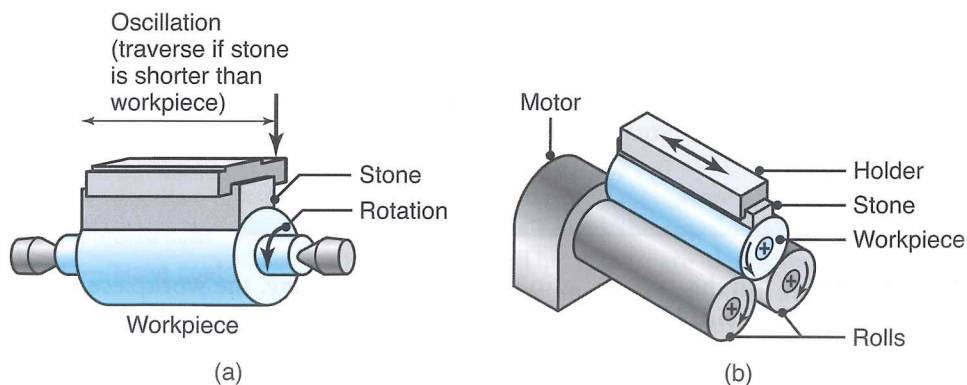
Schematic illustrations of the superfinishing process for a cylindrical part. (a) Cylindrical microhoning. (b) Centerless microhoning.
